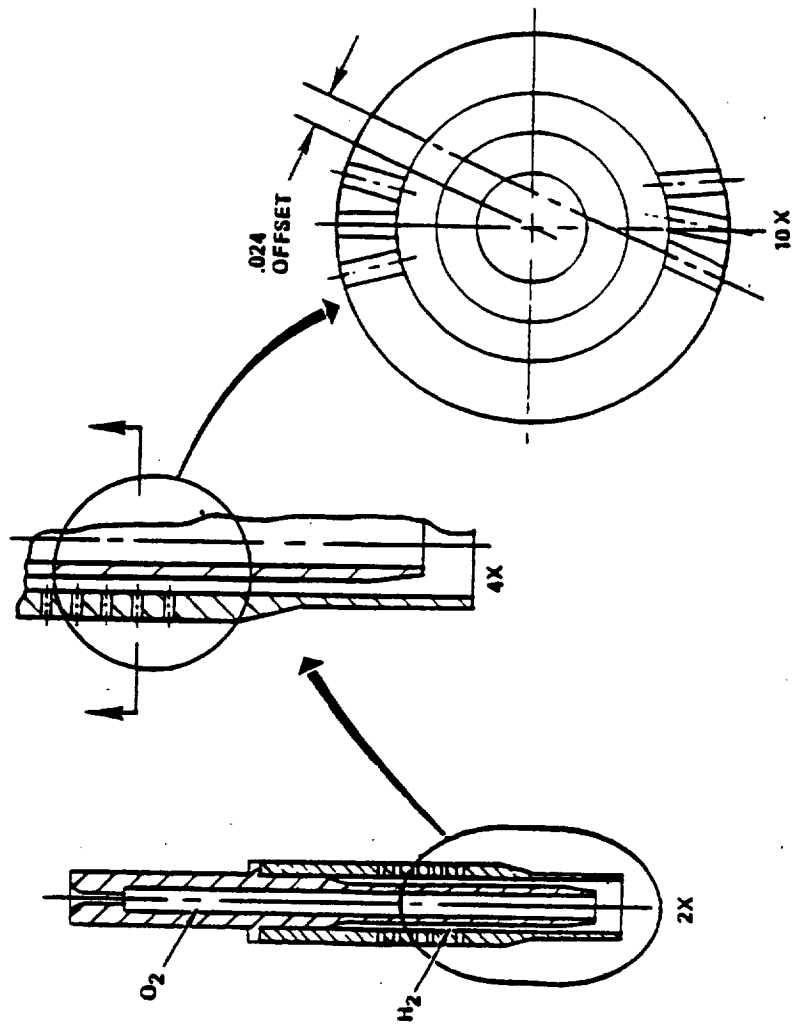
Offset Holes in Preburner Fuel Sleeves
